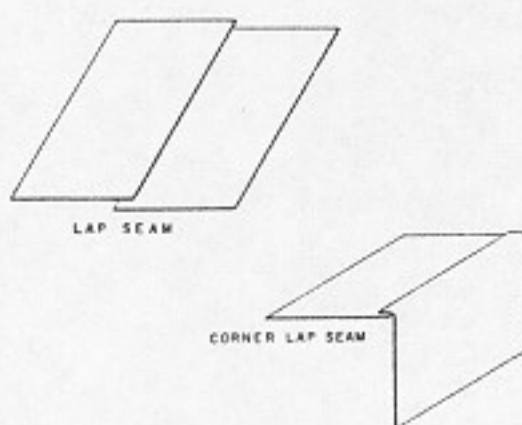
The lap seam is the easiest to make and the simplest of the seams used in sheet metal work.
